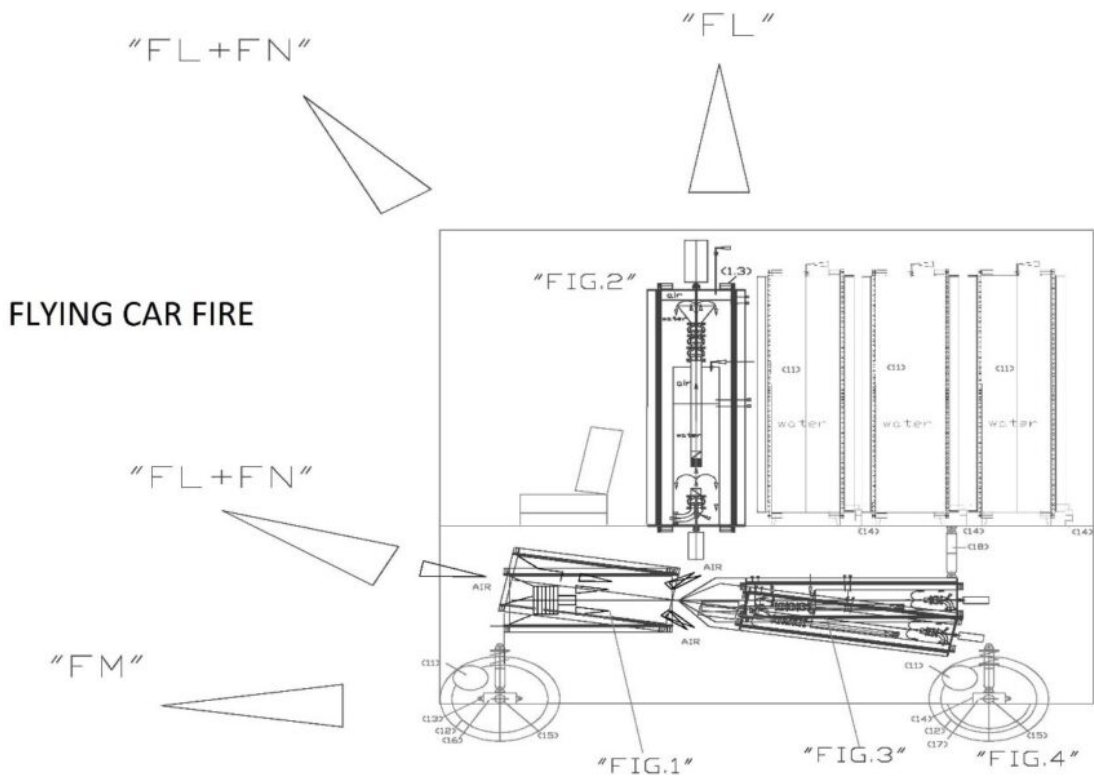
Lorentz thrust (FL), Newton thrust (FN), drive thrust due to the wheels (FM), electric wheel motors (11), wheels (12), support support for the front wheel drive (13) and rear (14), front axle (16) equipped with an articulated frame to allow minimum turning radii, rigid rear axle (17), electric actuator (18) that changes the inclination of the global linear motor placed under the floor of the car (Fig 1+ Fig3) cylindrical water tanks (11) equipped with sliding tracks for the permanent magnets and external solenoids (1.8) and accessories (1.3,1.4, 1.5. 1.6,1.7) powered by the primary energy produced by the current generators (3.1) of both global linear motors (inside and outside the passenger compartment).
